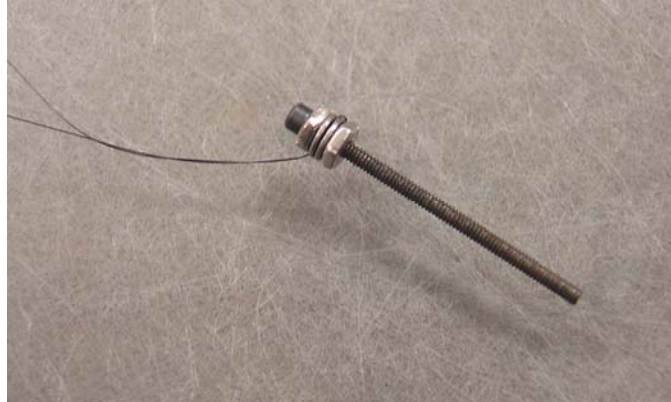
Anchor Screw with SMA Assembly Attached
